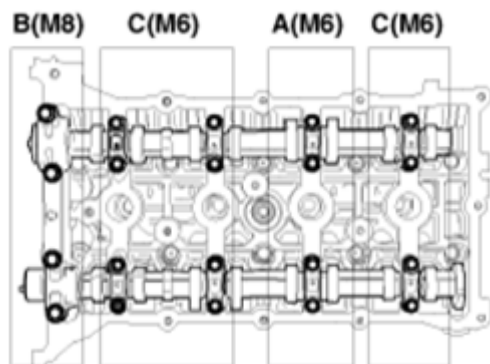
Camshaft Bearing Caps Tightening Sequence
